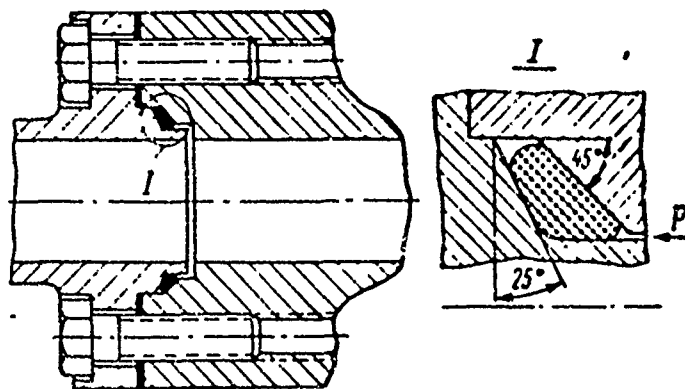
Seal using a round rubber ring in a wedge-shaped opening.
